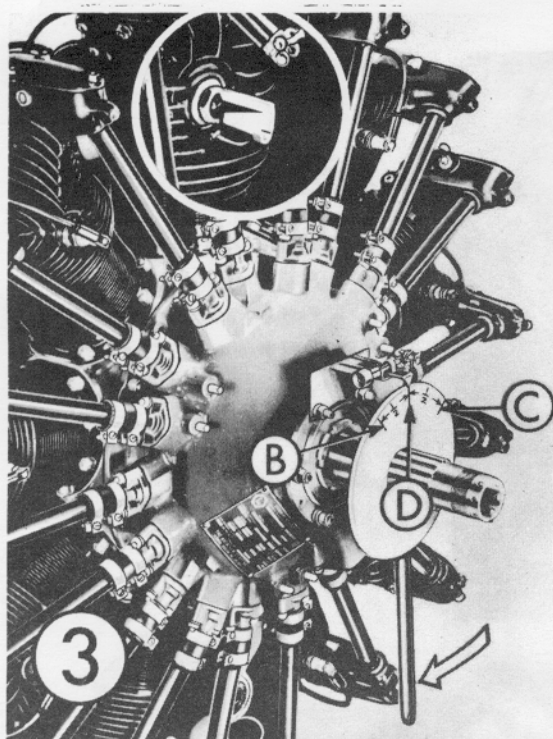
Finding Top Dead Center (Sheet 1 of 2 Sheets)
